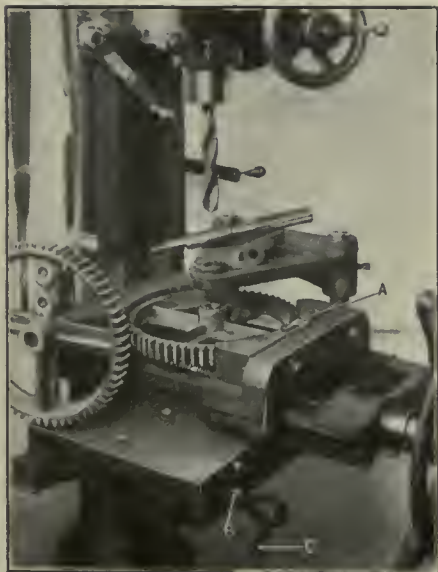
GEAR AND PULLEY DRILLING AND REAMING FIXTURE.
